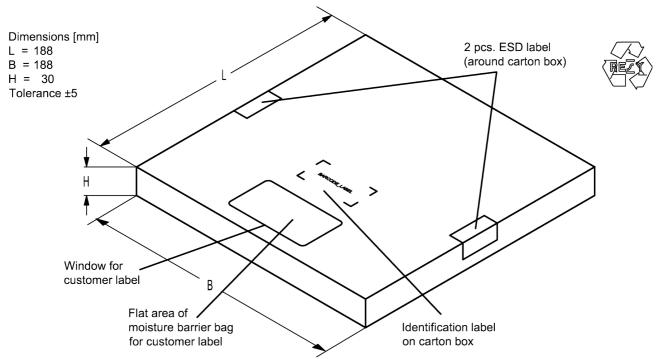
Drawing of folding box for reel with diameter of 180 mm.
